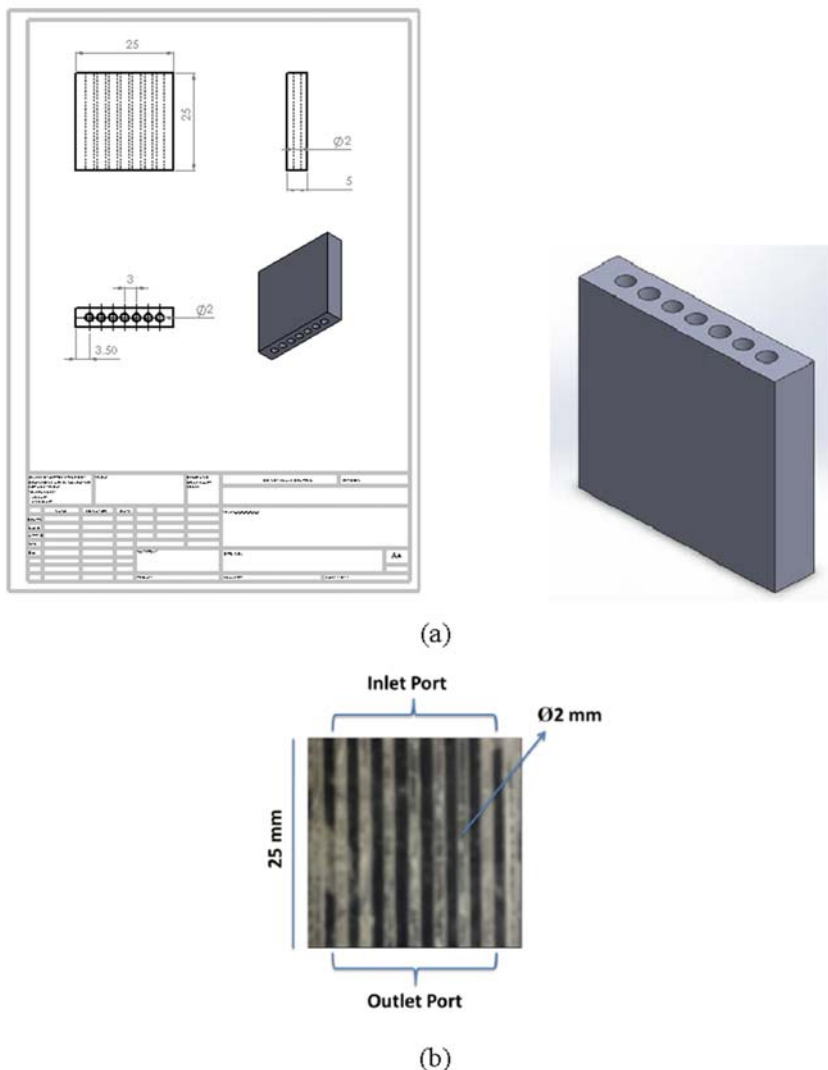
(A) Drawing and CAD model (isometric view) (B) 3D printed device.
